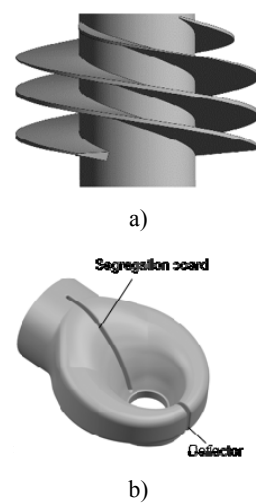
Geometry of a) the inducer impeller; b) the annulus casing.
